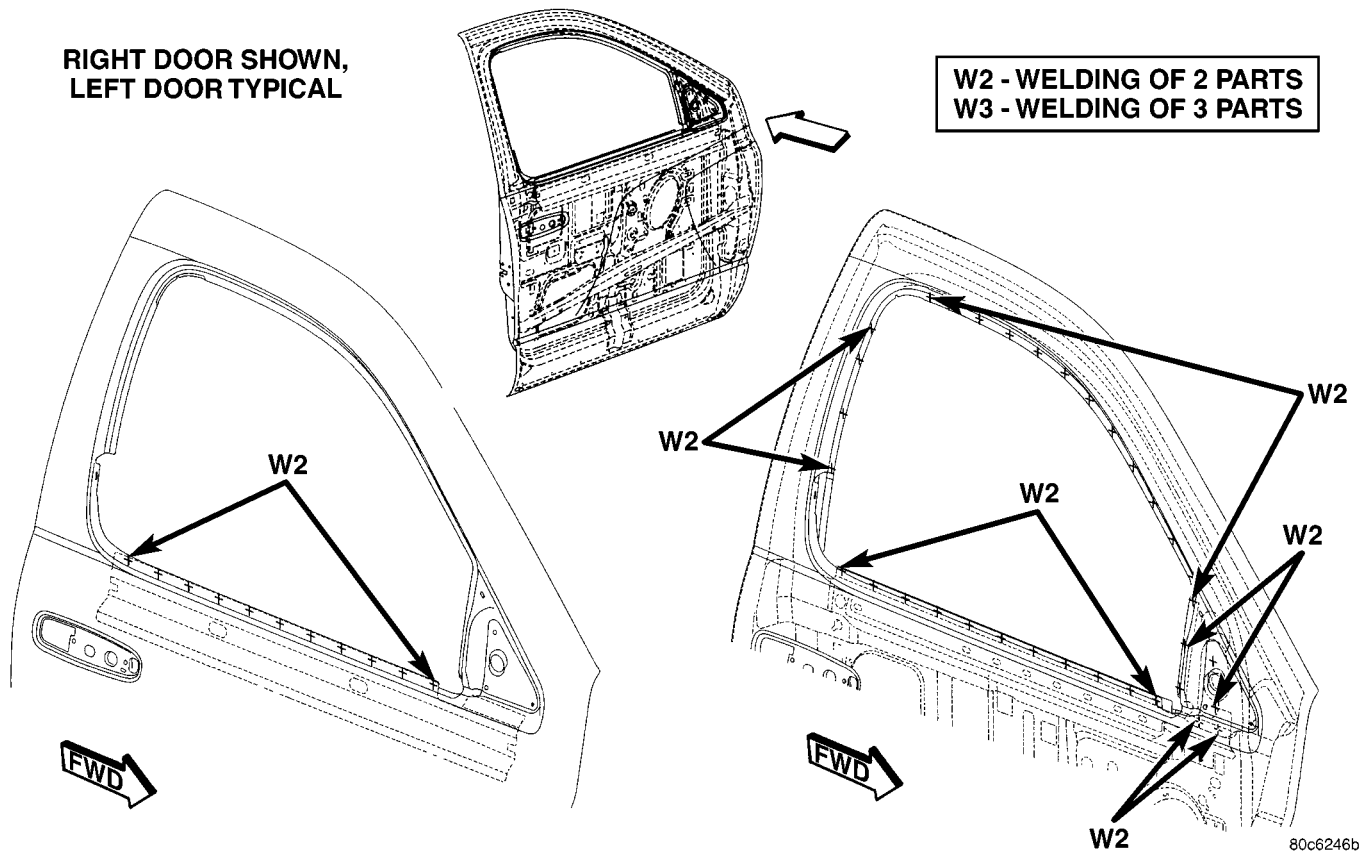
INNER DOOR PANEL - STANDARD CAB
